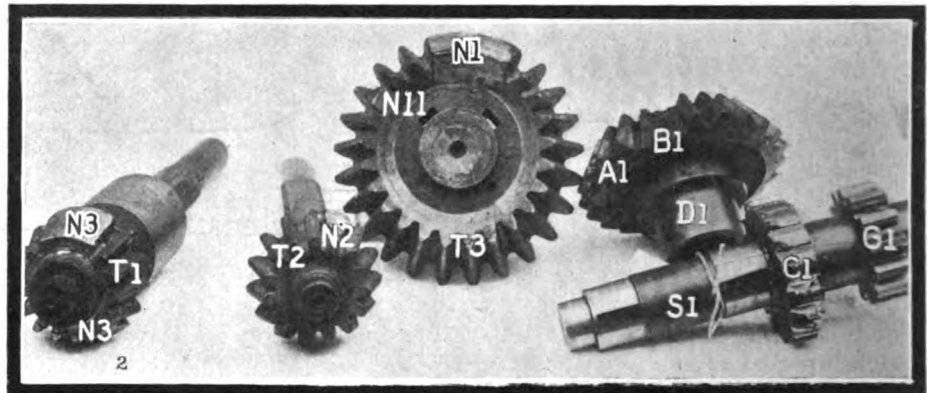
Showing gear wheels in the broken state and after the welding repair has been effected
